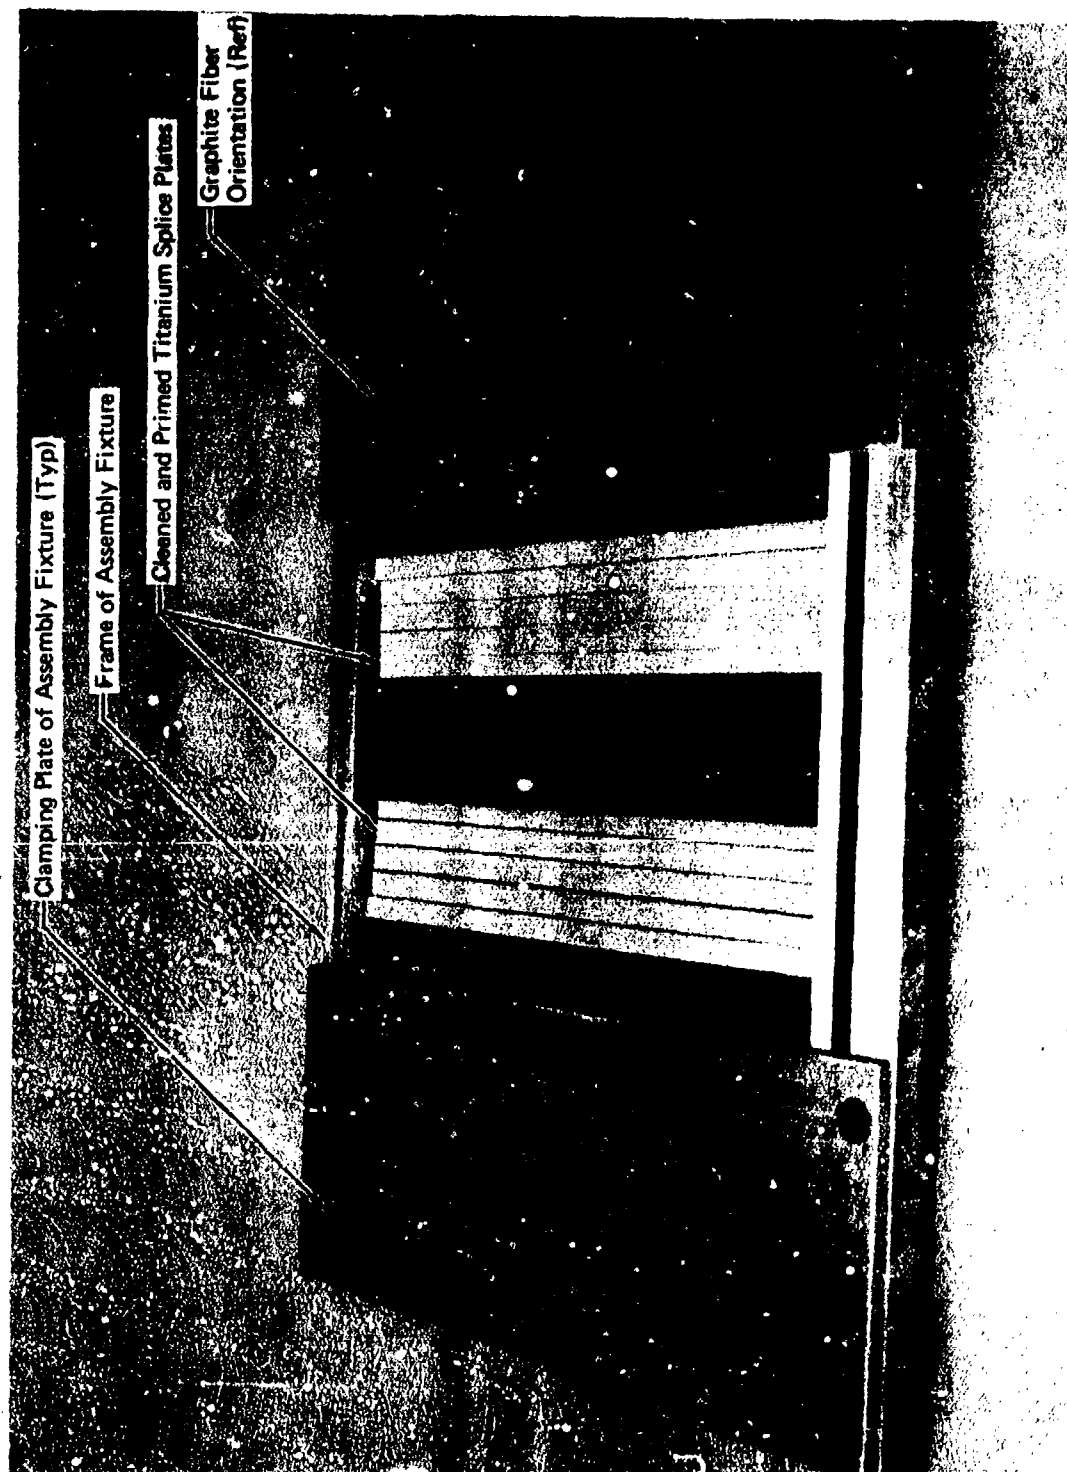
TITANIUM SPLICE PLATES POSITIONED IN ASSEMBLY FIXTURE
